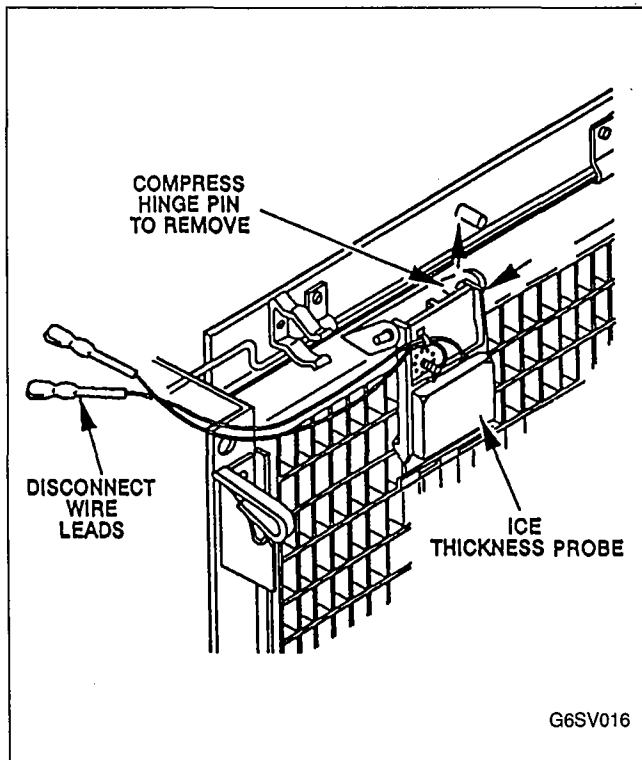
ICE THICKNESS PROBE REMOVAL
